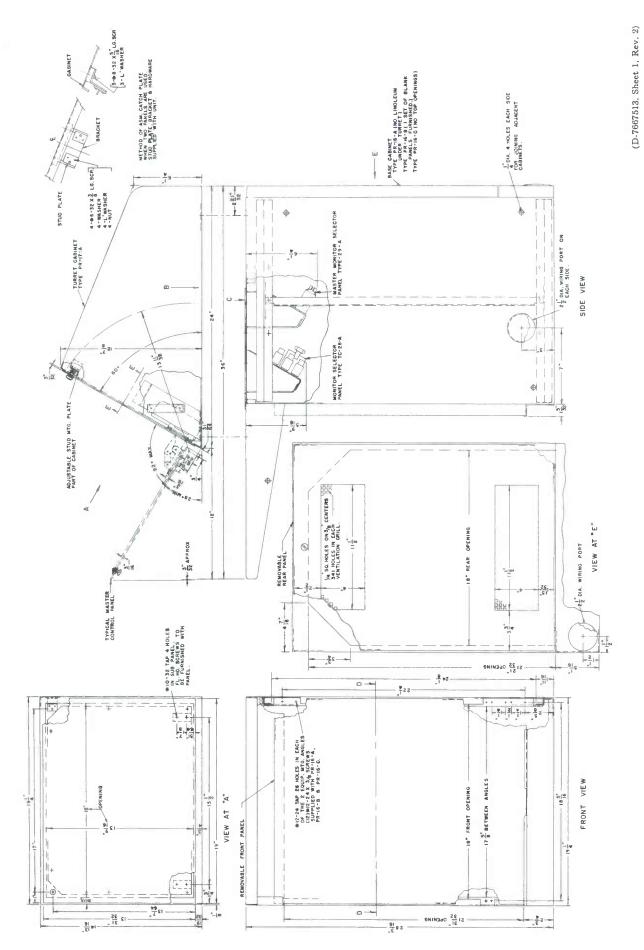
A Cabinets, Types PR-17-A and PR-16-A, -B, -C, Outline and Clearances Drawing
